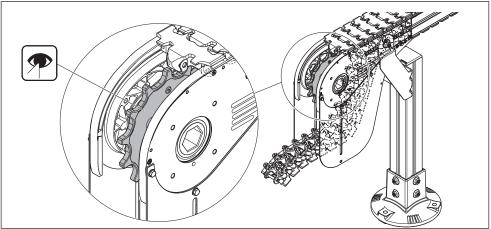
Drive wheel: touch and visually check the teeth when the chain is open
